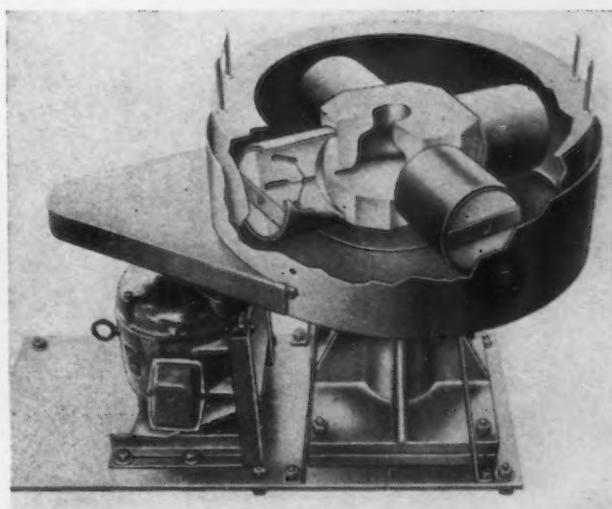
Ecco 4-flask centrifugal casting machine operated by a 1/2 hp. motor. Motor not shown on base.
